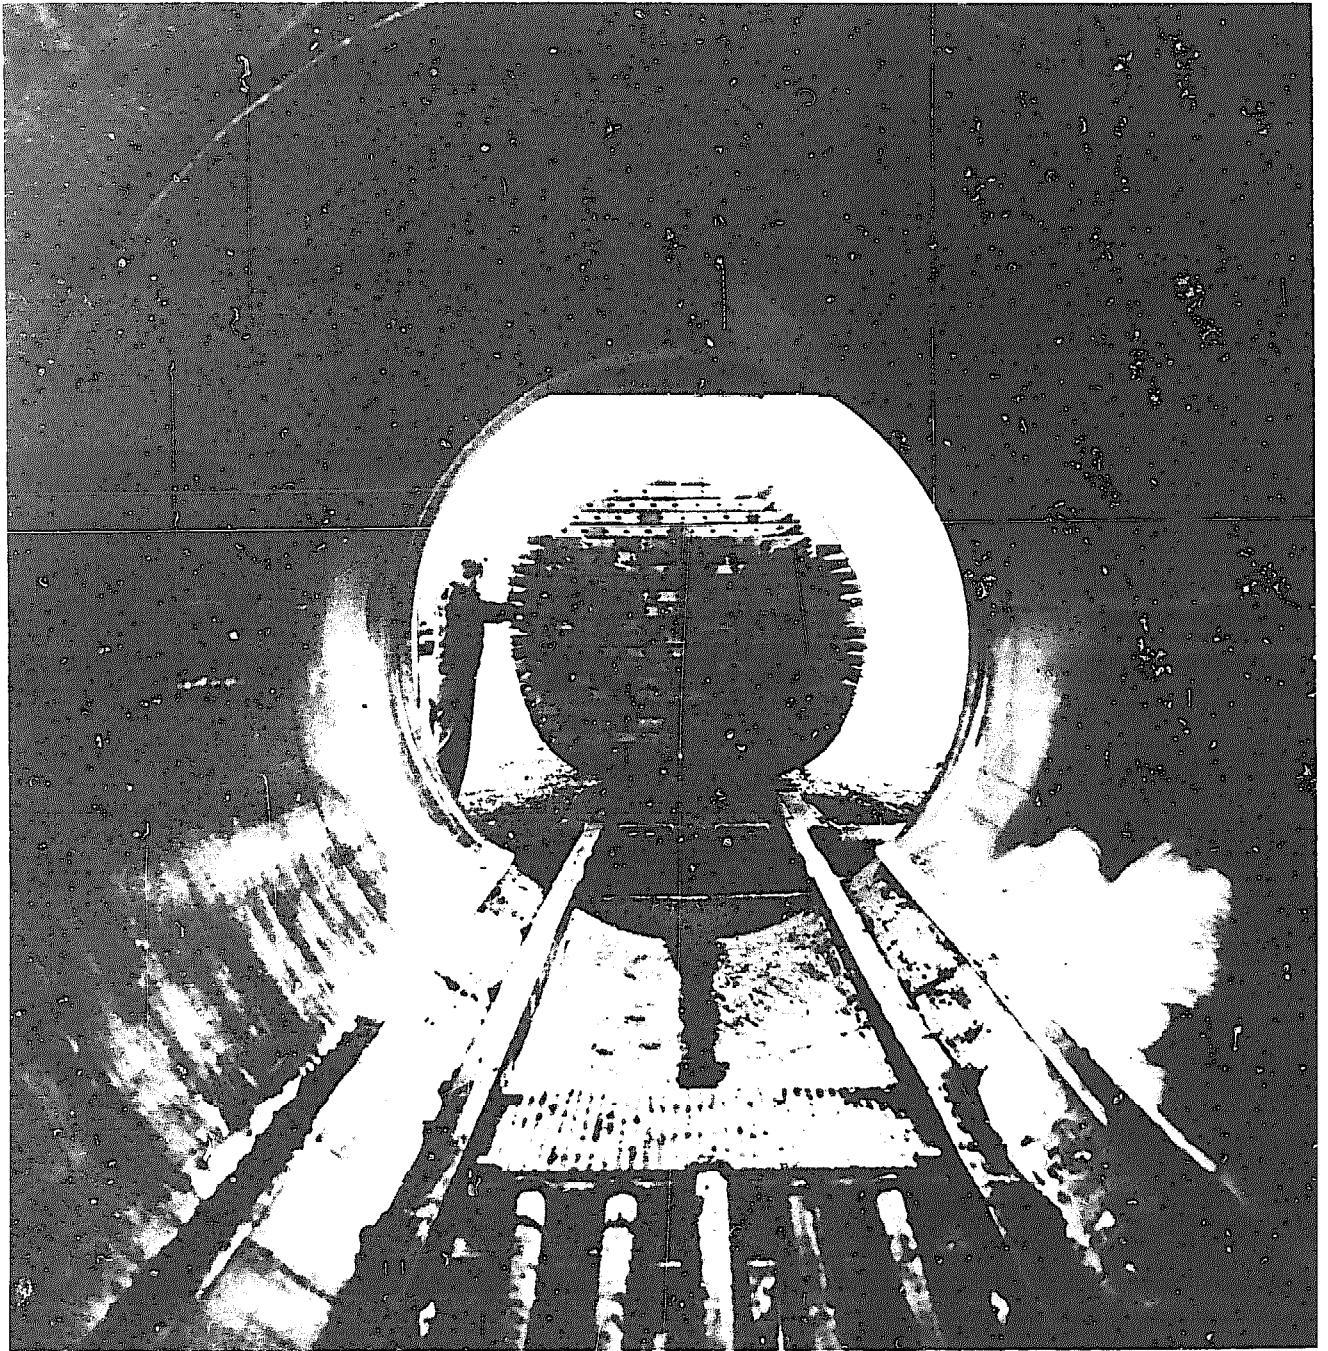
Interior view of treating cylinder at wood-preserving plant, with a load about to come in.
